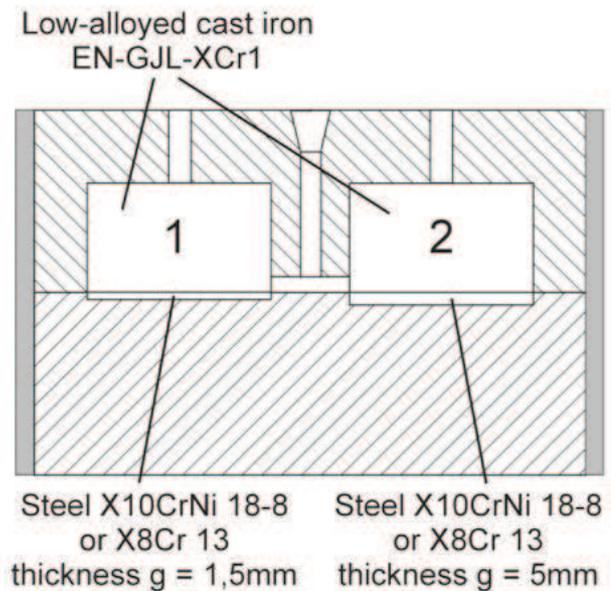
Section of the sand mould ready to be poured by liquid alloy
